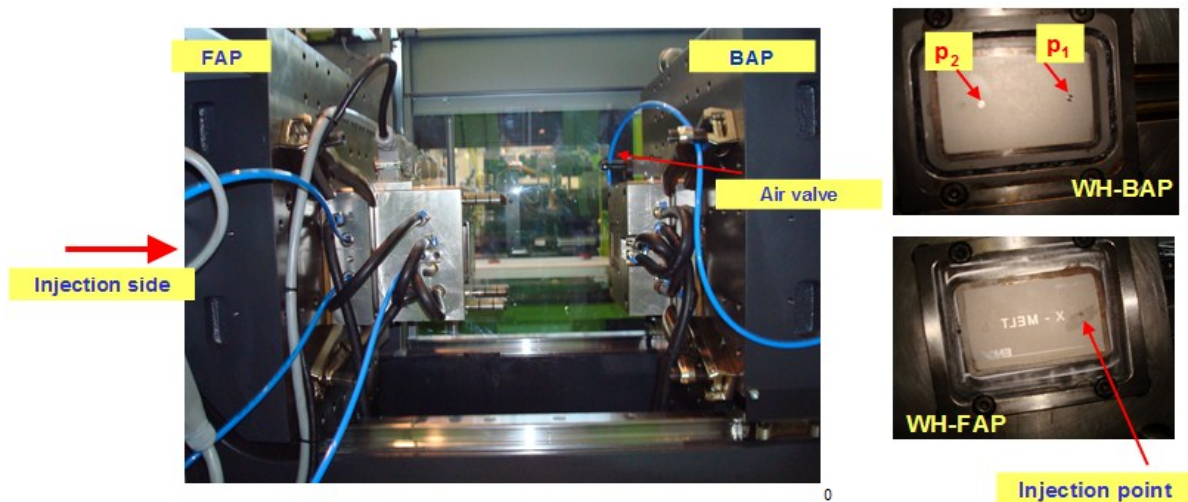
Experimental setup of the check card mould mounted on ENGEL VC 940/130 (Left) and mould halves of check card mould (right); FAP fixed mould half, BAP movable mould half.
